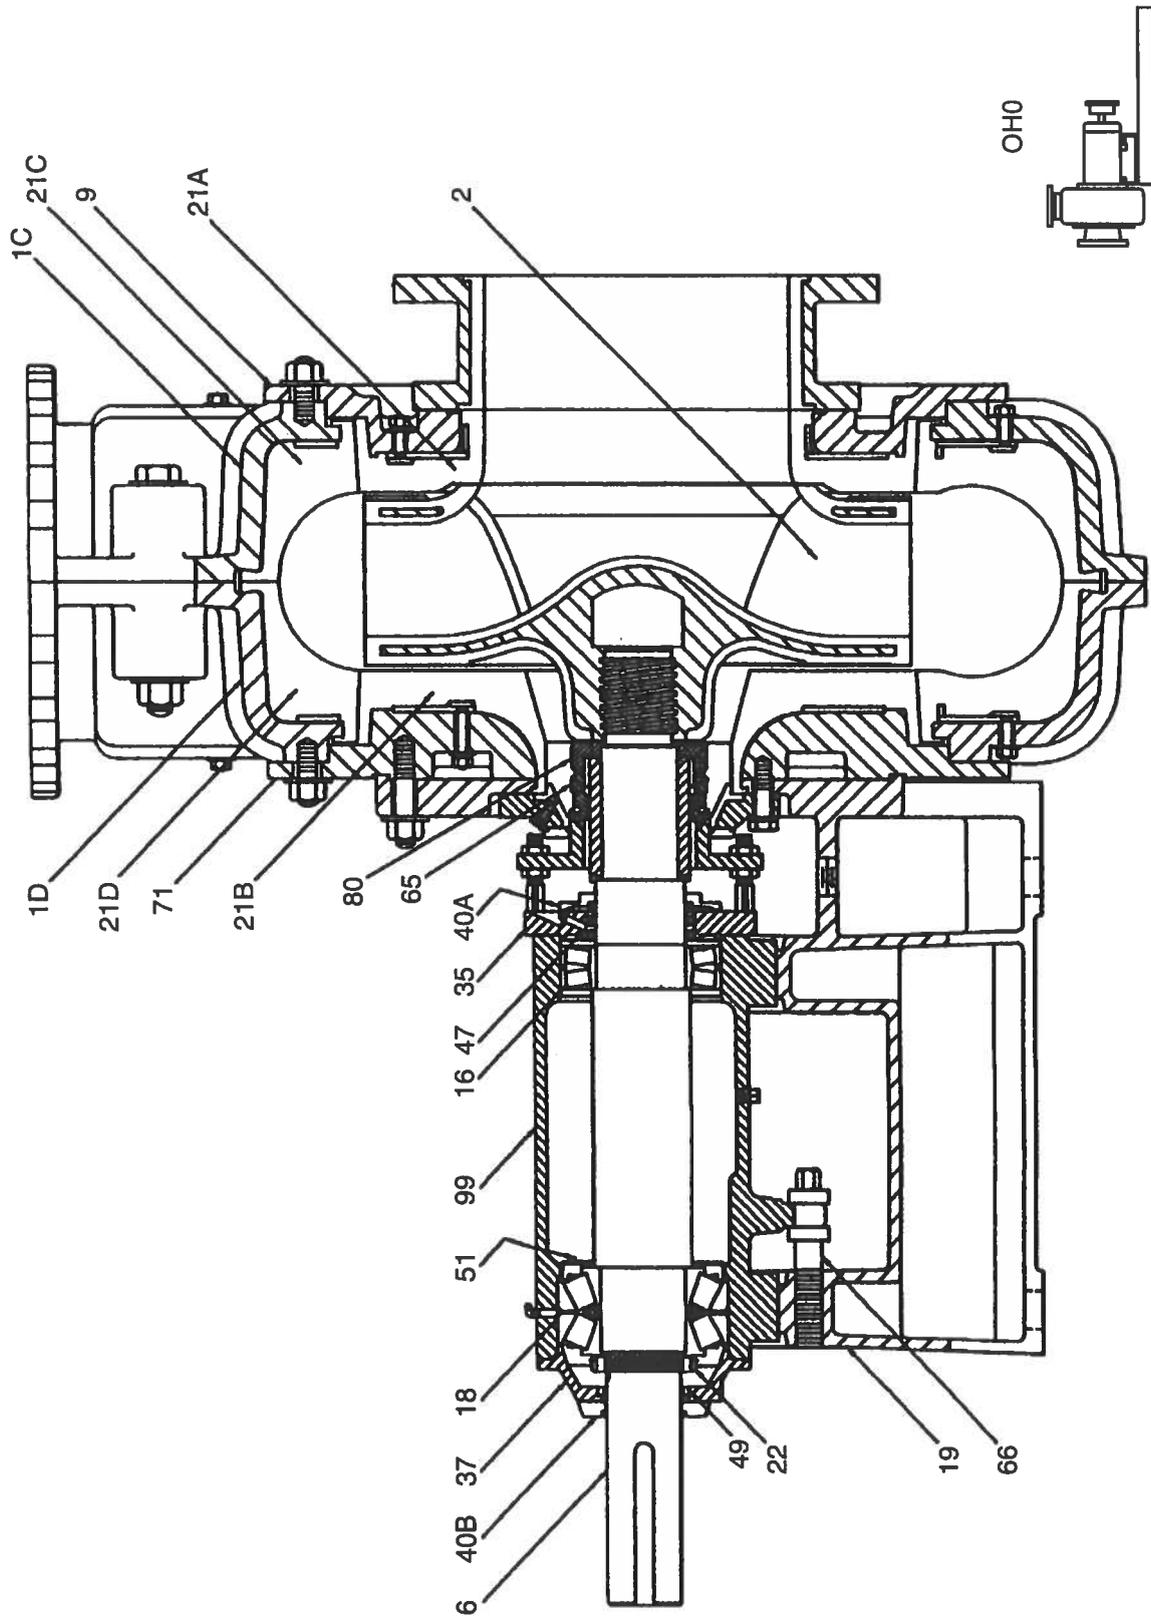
Overhung impeller — flexibly coupled — single stage — frame mounted — lined pump
